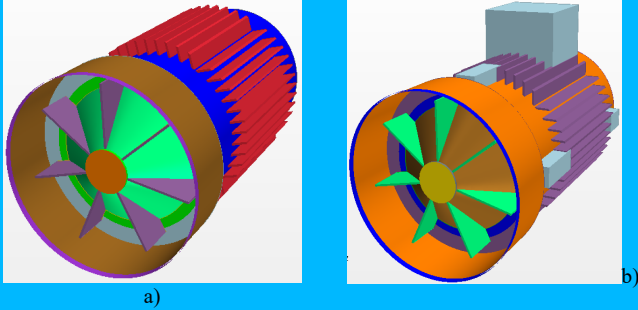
Simulated Fan models within Siemens machine: a) 3D model generated in *Motor-CAD* and imported to *Star-CCM+*, and b) modified with connection box and cover screws
